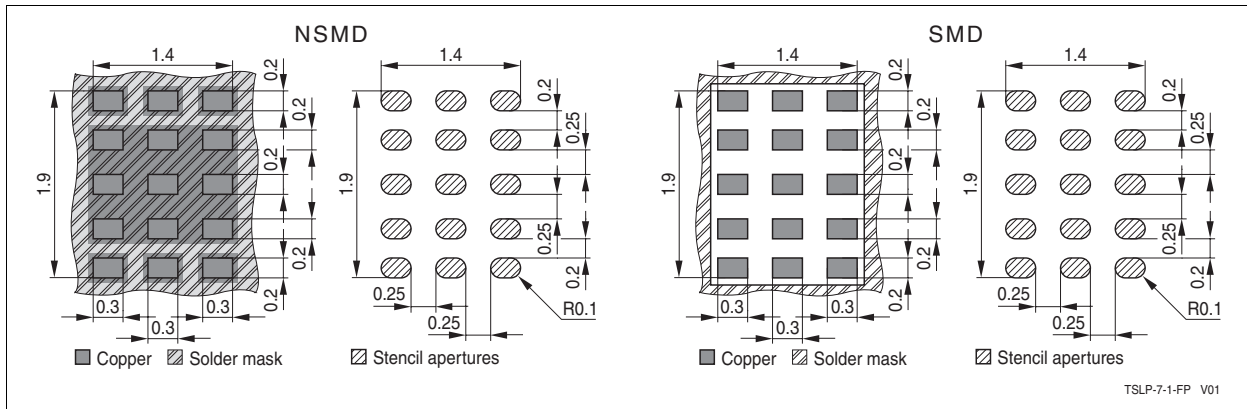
Recommended footprint and stencil layout for the TSLP-7-1 package
